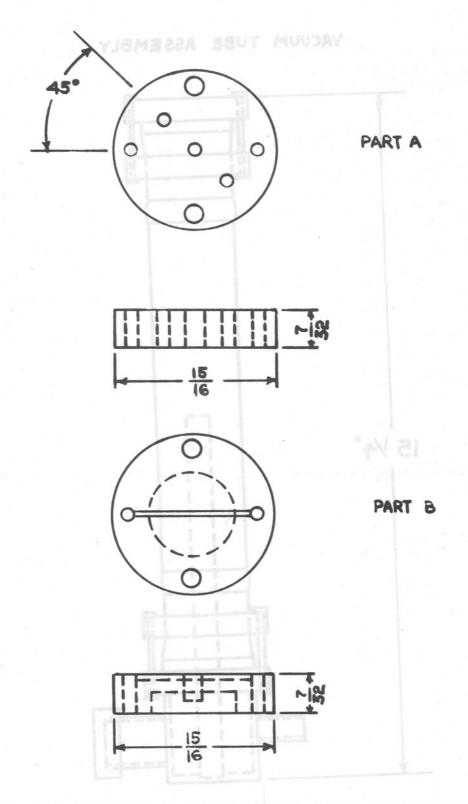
High temperature dielectric measuring setup - sample holder, parts A and B.
